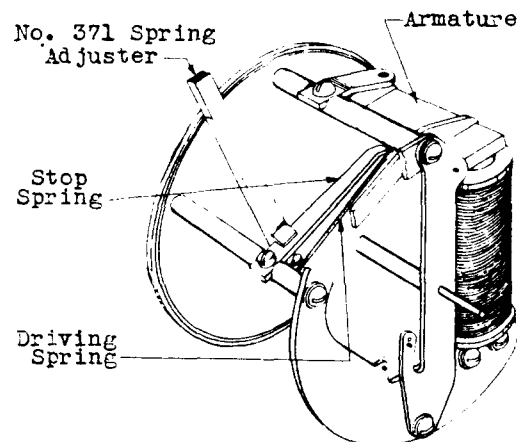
Method of Adjusting to Meet Electrical Requirements
